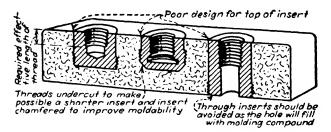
Inserts in molded plastics pieces should be carefully designed to prevent the molding compound from entering threads. Outer faces of inserts if flush with the surface of the molded part unless in perfect alignment offer an opportunity for molding compound to flow into spaces not tightly sealed. Inserts should be as short as possible and chamfered to reduce possibility of displacement during molding.
